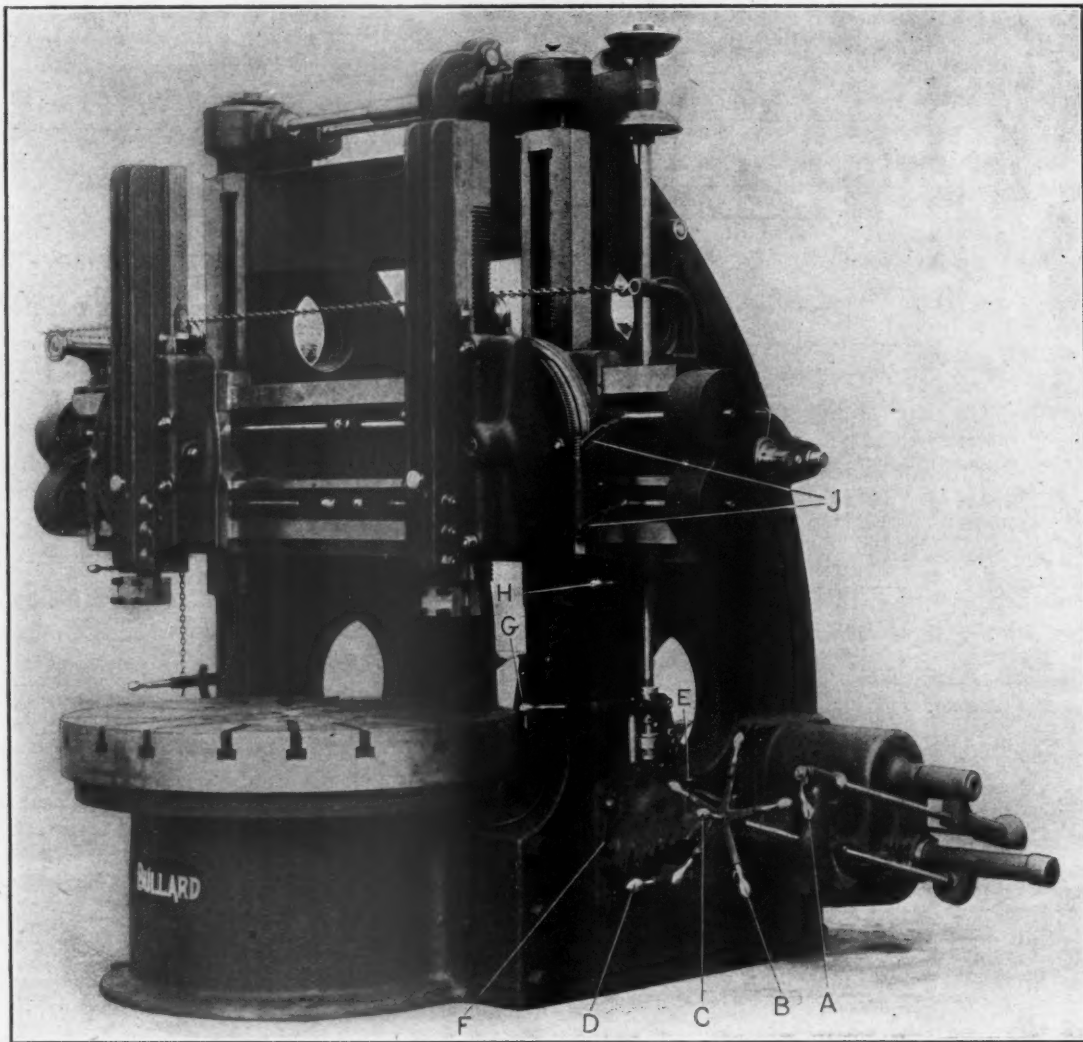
BULLARD 54-INCH RAPID PRODUCTION BORING MILL.
